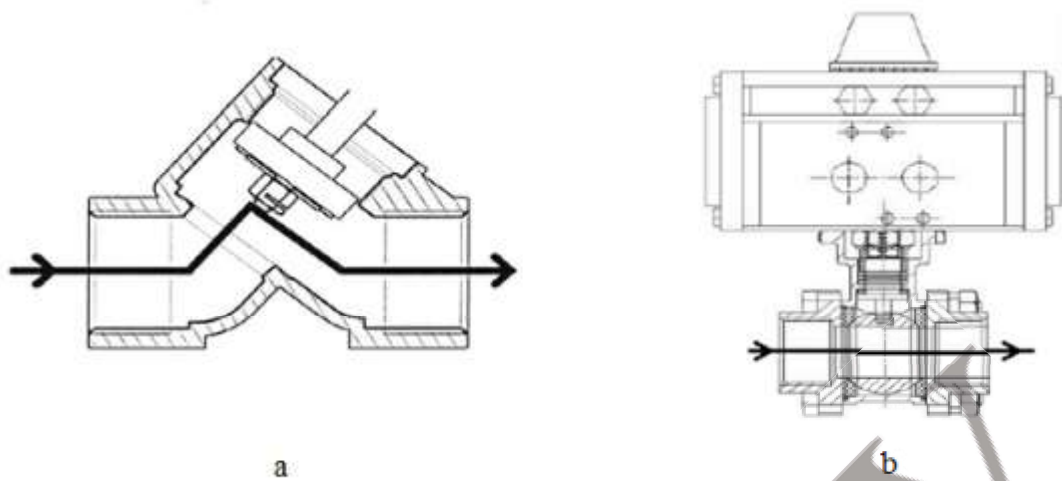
The direction of the product when passing through: a – saddle valve, b – ball valve on the right
